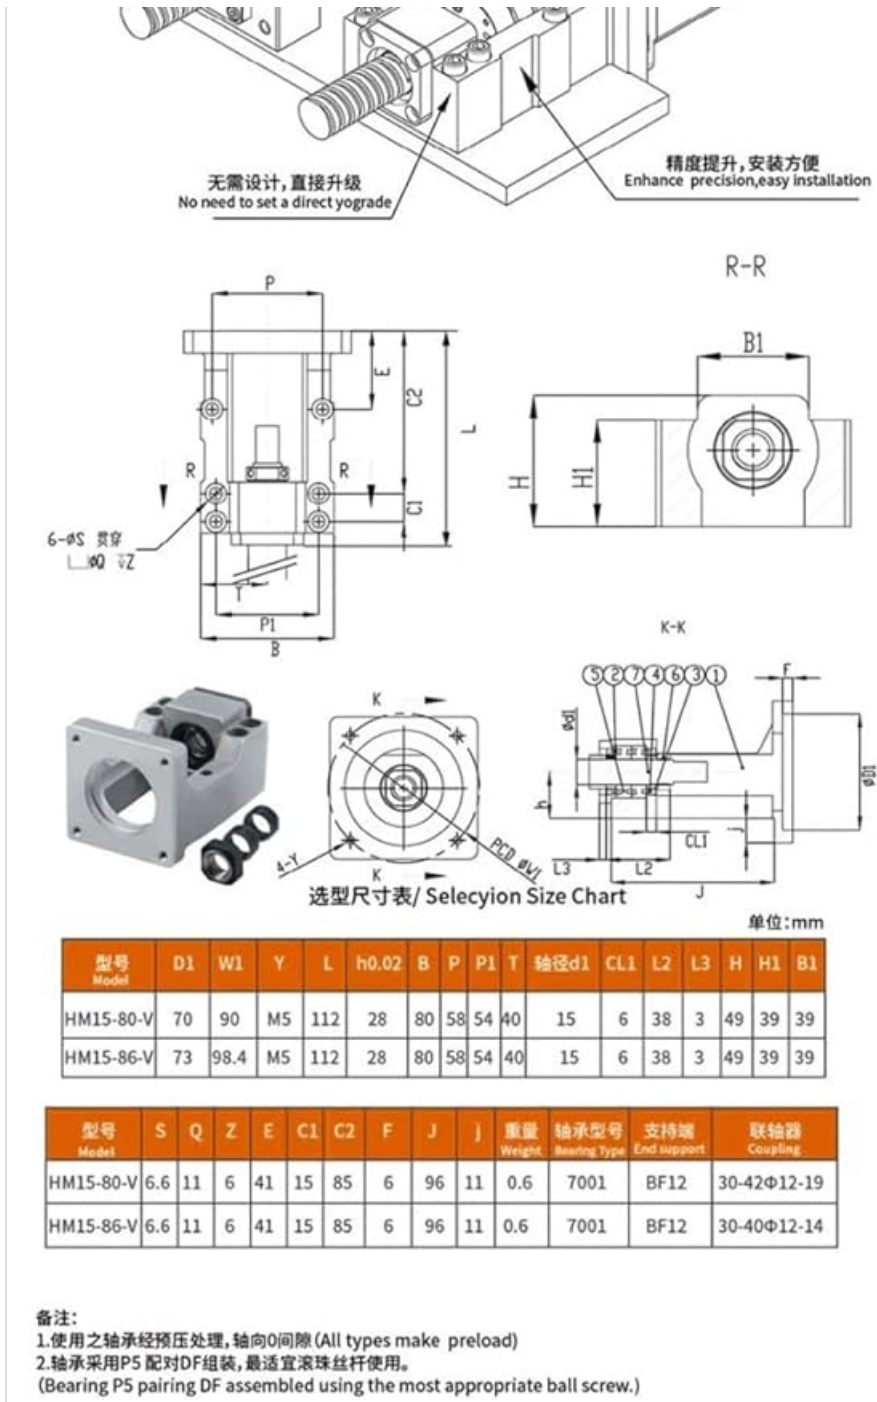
Technical diagram for HM15-80 and HM15-86 series mounts, including dimensions and assembly details.
